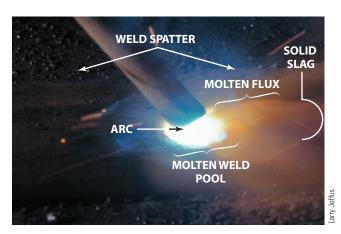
More experienced welders can see the molten pool, metal being transferred across the arc, and penetration into the base metal.
